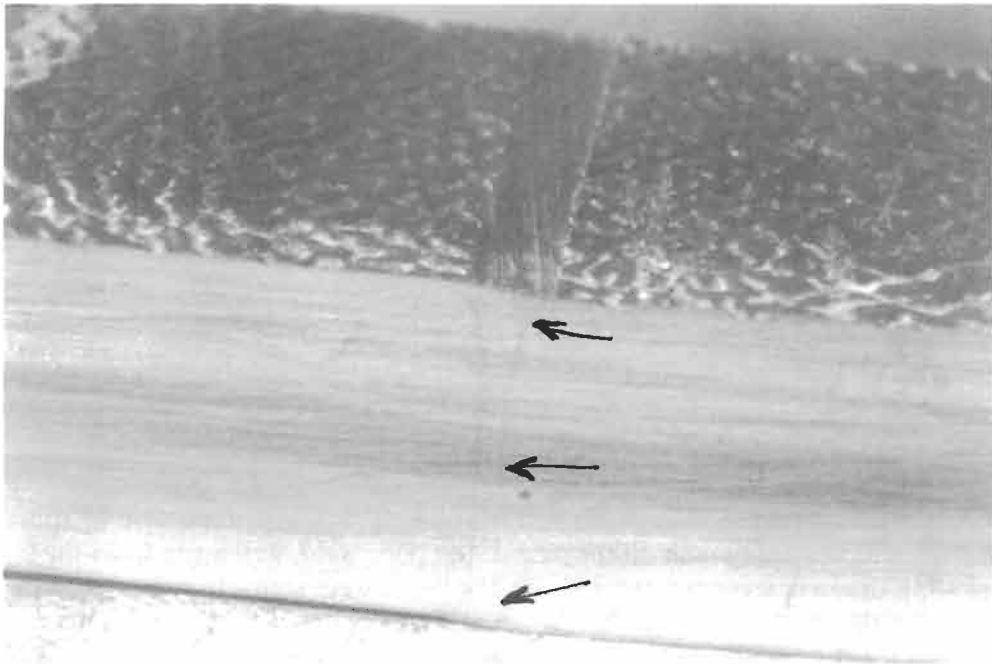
Close-up of weld section from an intact panel. The section has been finally polished with 1600 grade emery paper and exposed to boiling xylene vapour. The weld appears wider at the outer and inner surfaces of the panel (arrows), and the darker central line represents the original join of the sheets. The weld section from the failed panel showed a slightly thinner central zone.
